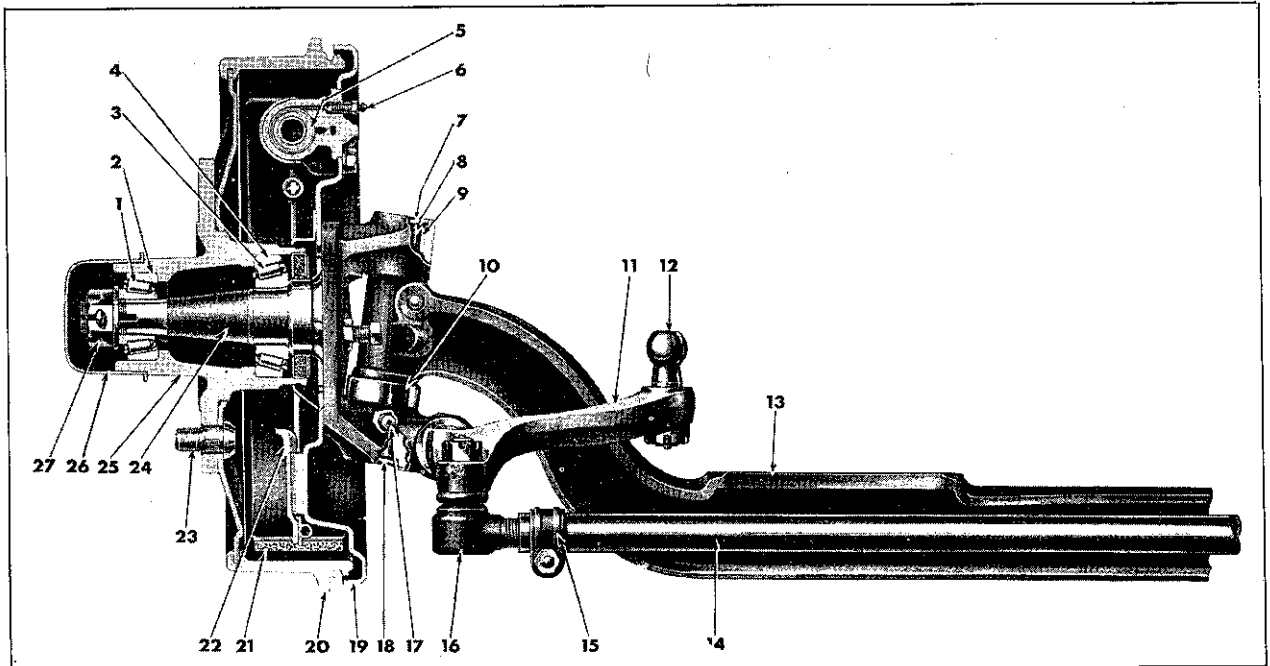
FRONT AXLE—2-WHEEL-DRIVE MODELS
